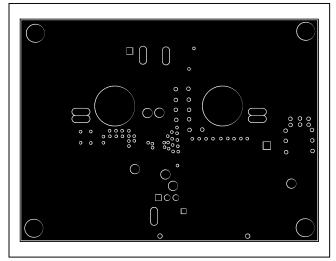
MAX15090 EV Kit PCB Layout—Layer 3 (GND)
